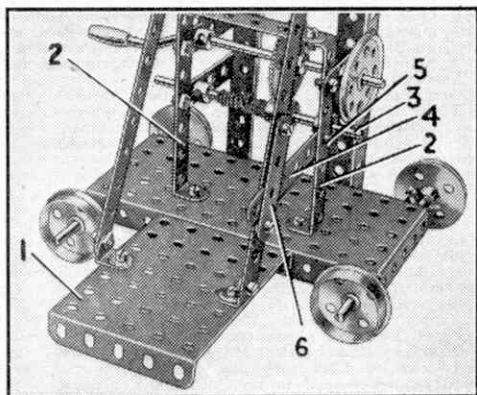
Close-up of base of pile driver, showing winding mechanism.
